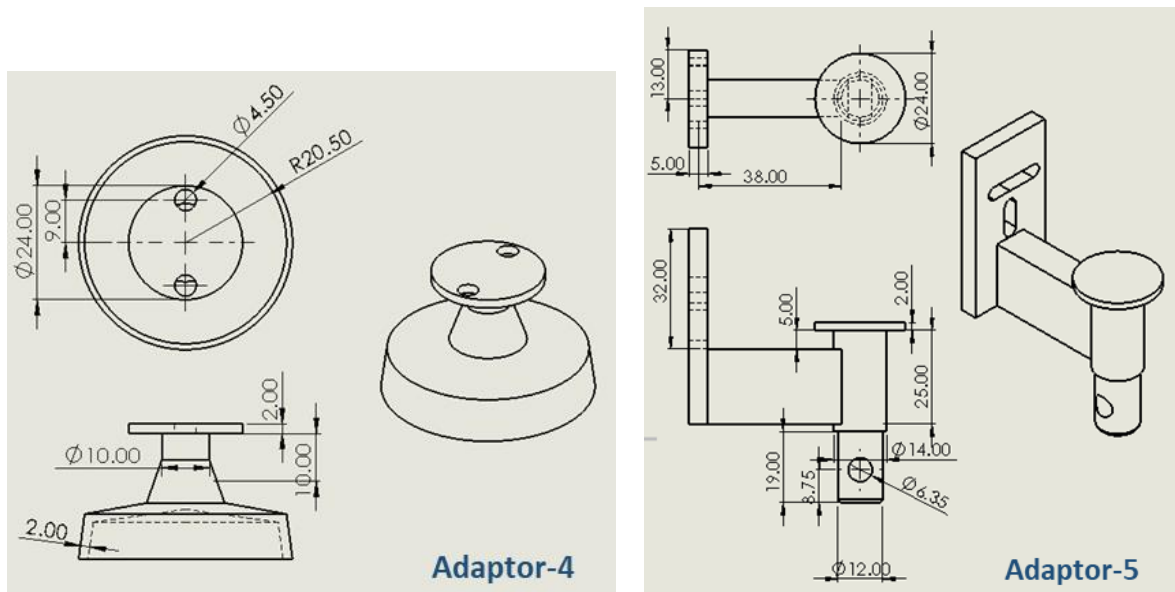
Detailed Mechanical Drawing of Adaptor-4 and Adaptor-5.
